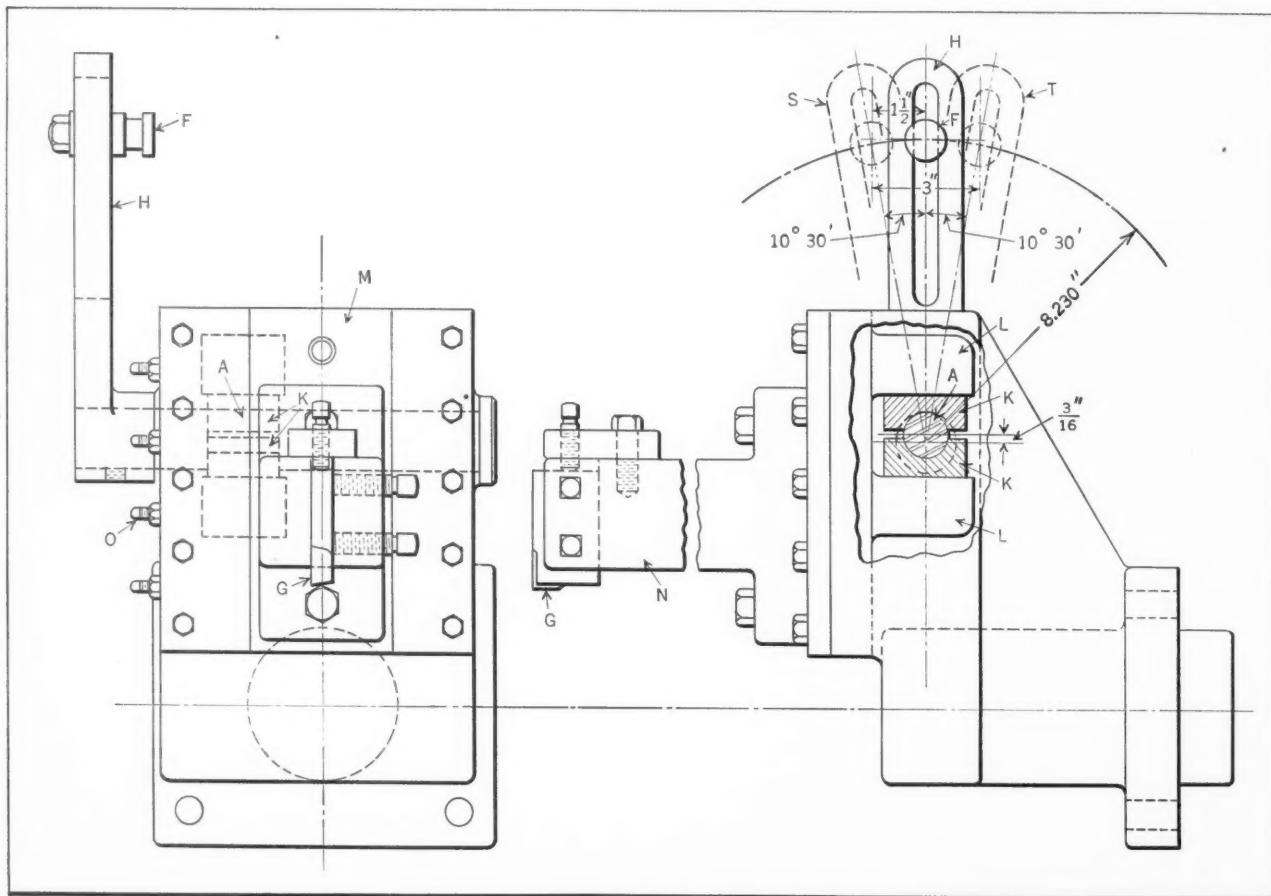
Details of Crown-turning Fixture Shown in Fig. 1
